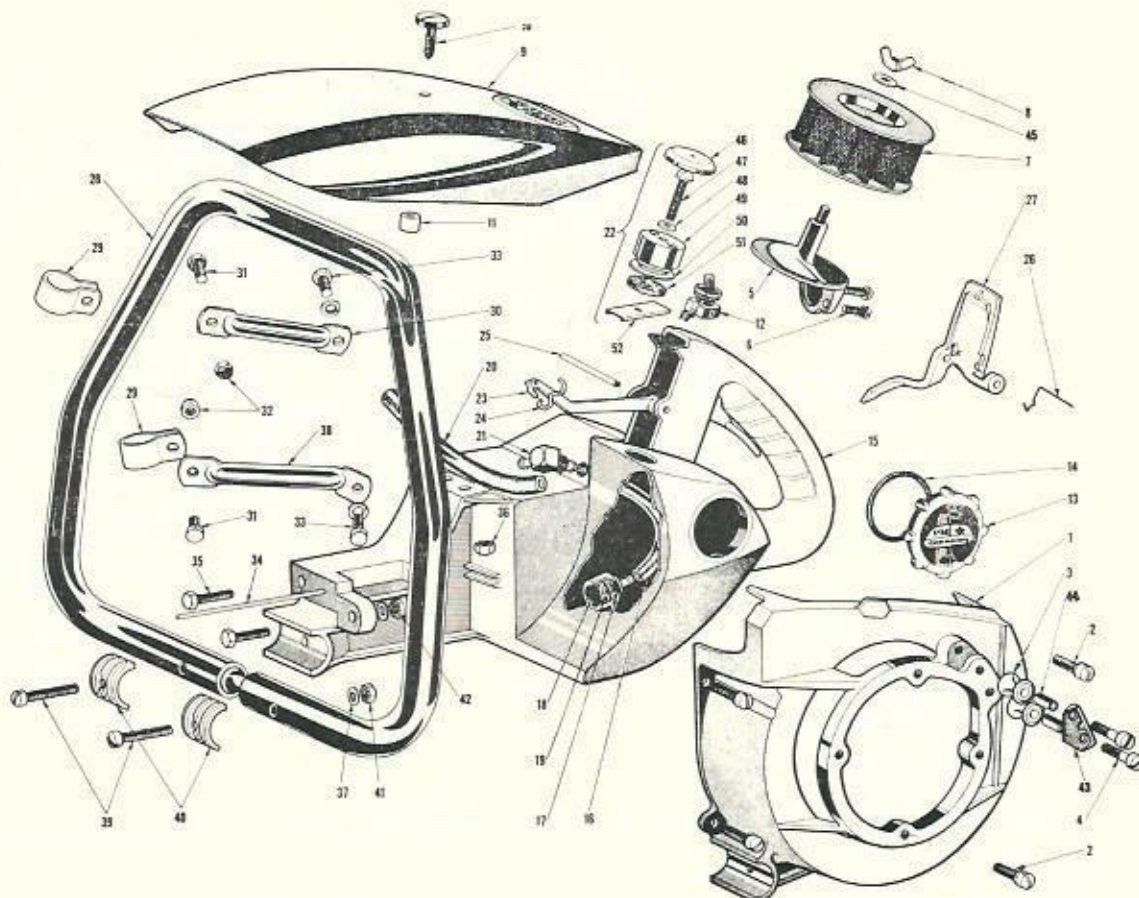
Exploded view of fuel tank, blower housing and air cleaner assemblies for Model 275 chain saw. Components of other model chain saws are similar.
